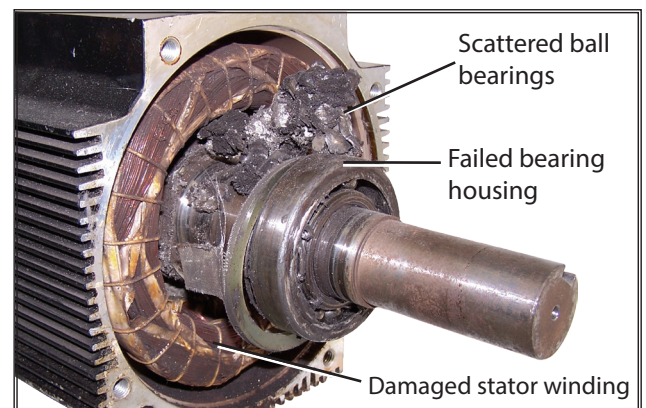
Bearing failure will destroy a motor without warning.
